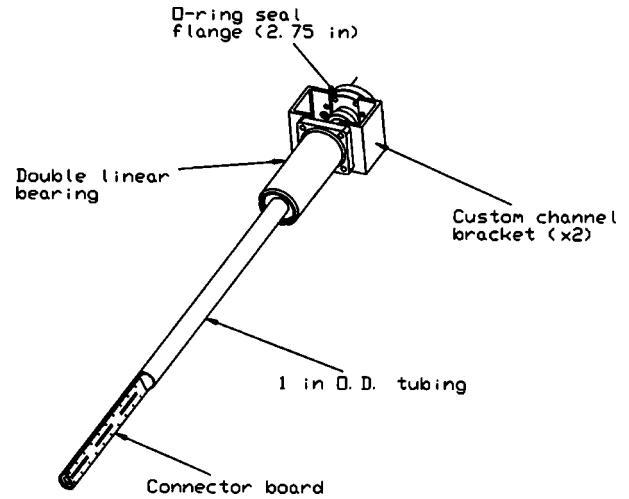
External view of the magnetic probe mounted on the Caltech vacuum chamber. The 2.75 in. O-ring seal flange is attached to the vacuum chamber flange. Note: Probe connectors and EMI shield not shown.
